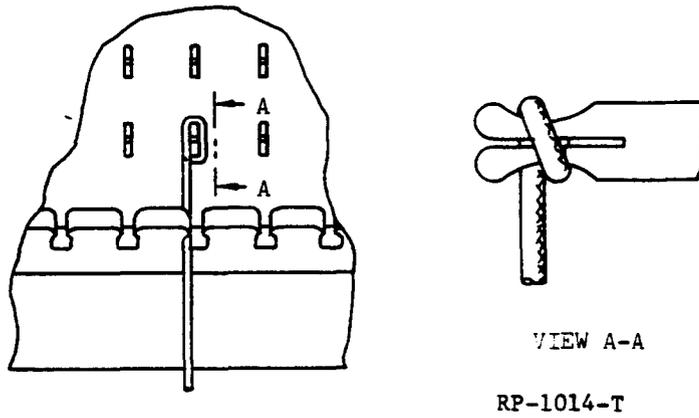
SOLDERLESS CONNECTION AT SPLIT TYPE TERMINALS
